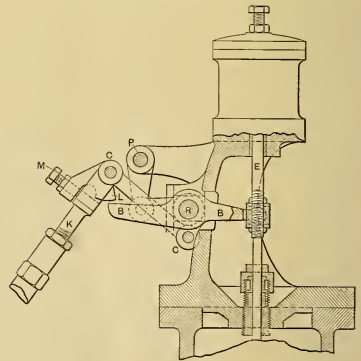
AN ENLARGED VIEW OF THE TRIP-LEVERS
